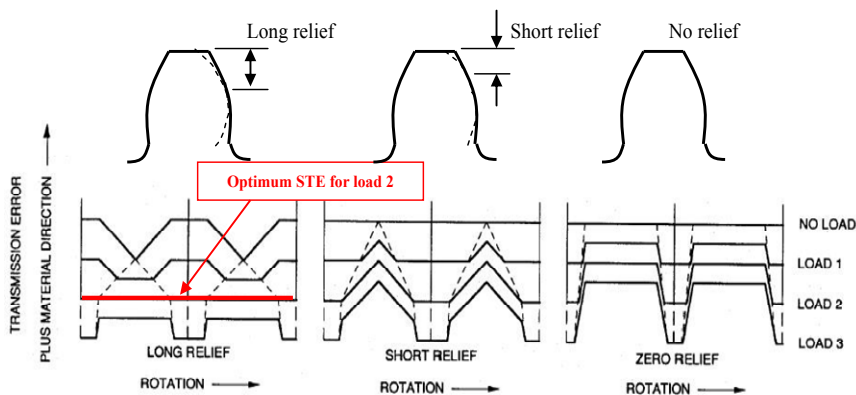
Optimum tooth profile modification of a spur gear.
